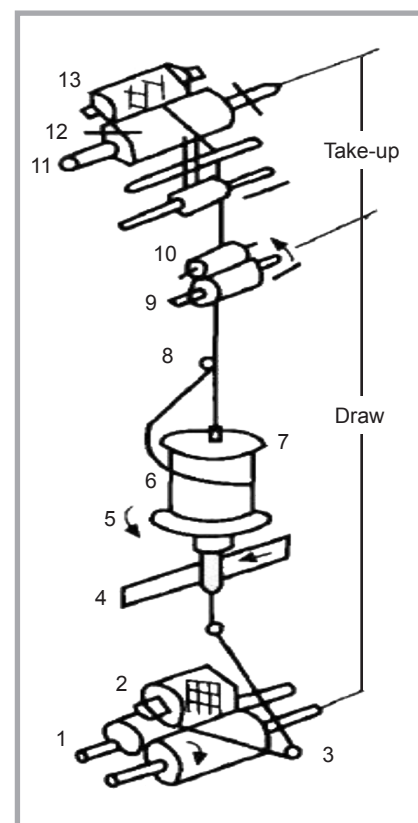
Schematic diagram of traditional mechanical yarn covering machine: 1) feed roller, 2) core yarn, 3) pre-draw roller, 4) tangential belt, 5) hollow spindle, 6) outer wrapping yarn, 7) bobbin of outer wrapping yarn, 8) thread eye, 9) drawing roll, 10) press roller, 11) guiding roller, 12) winding roller, 13) covered yarn.
